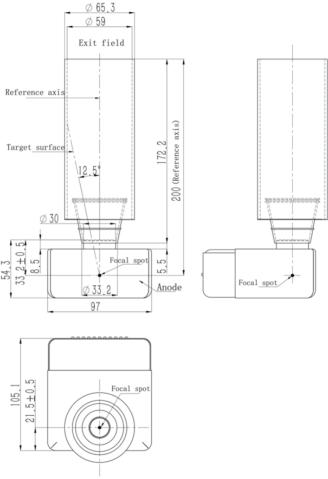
Dimension drawing of X-Ray source assembly 10.2 X-Ray Source Assembly
